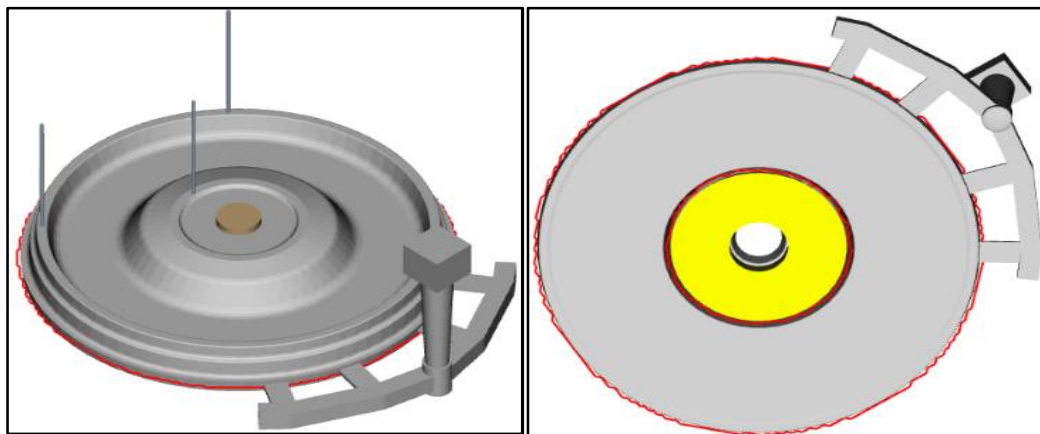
(a) Casting with chill used inside the core and connected with gating system. (b) Chill used inside the core.
